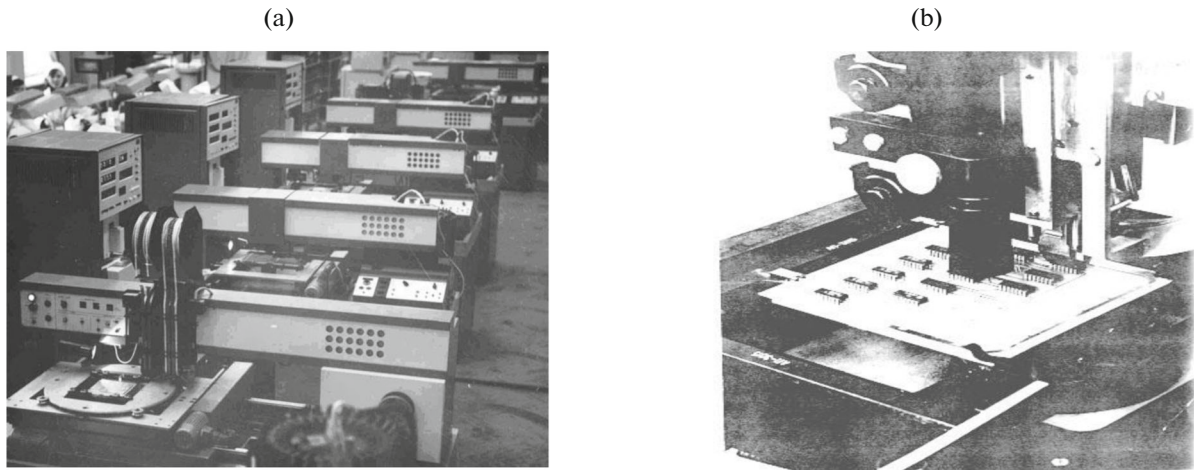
(a) Machines mounting component from tape and (b) assembly head.
